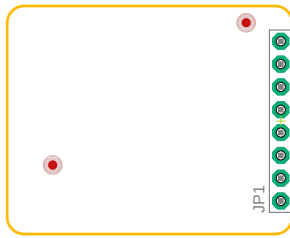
Board layout of a placeholder design block for a MicroSD Breakout Board [29].
